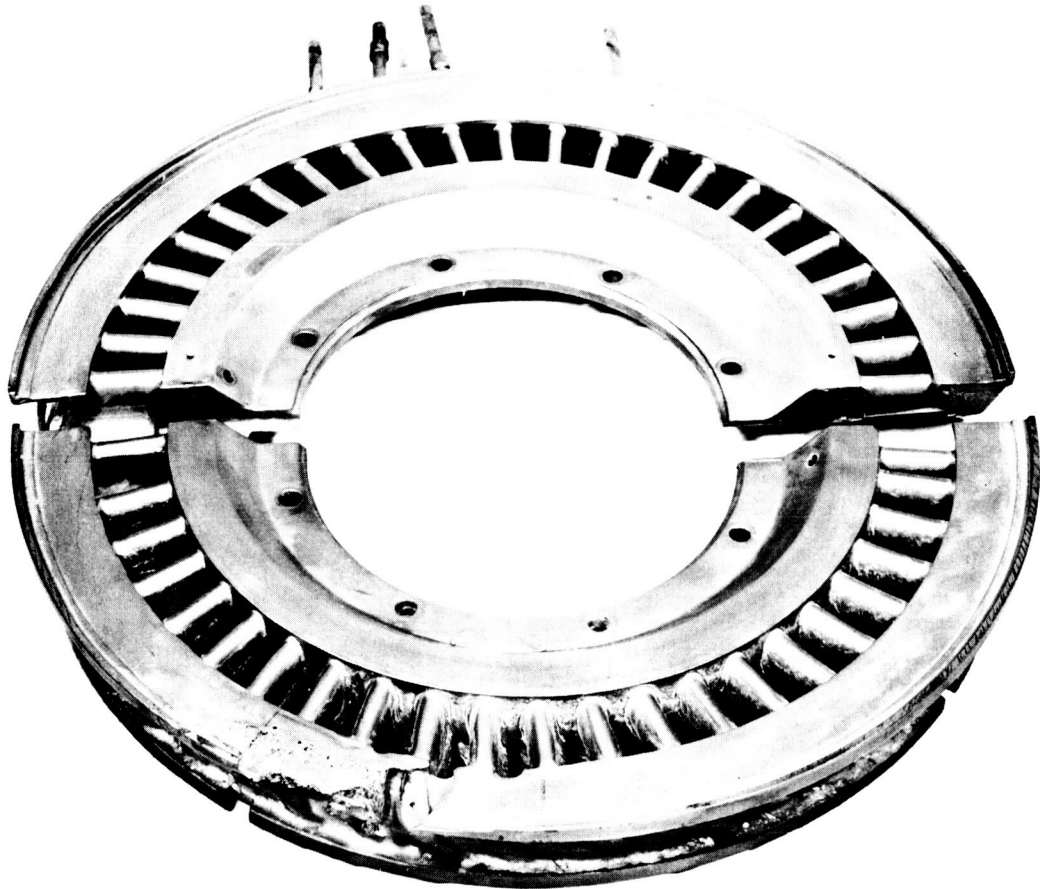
Stage 2 Nozzle Diaphragm After Removal From Casing
